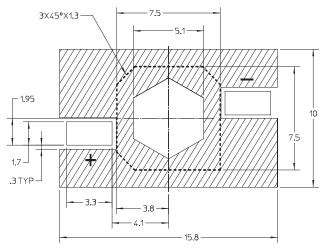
2-Lead Gullwing Package Solder Pad Layout.
